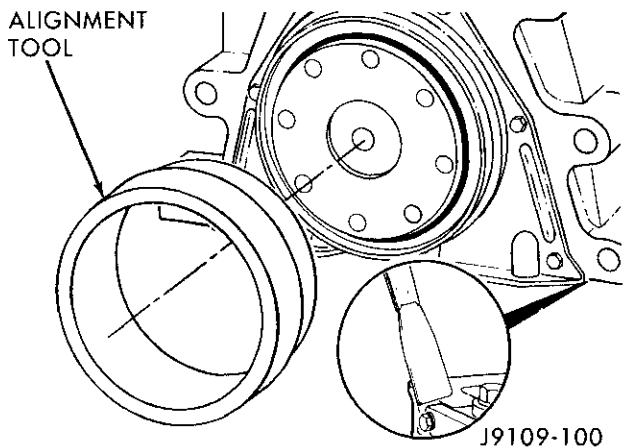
Crankshaft Rear Seal Housing Alignment Tool
